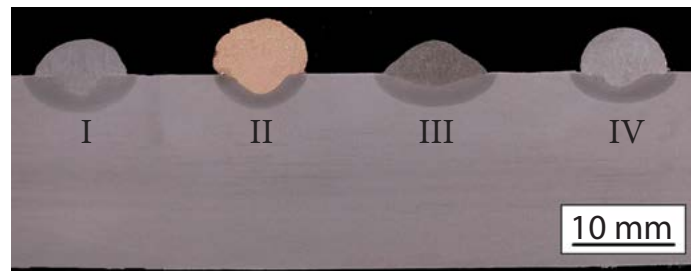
Macrostructure of overlay welds made with welding current of 160 A using filler metals wires presented in Table 2
